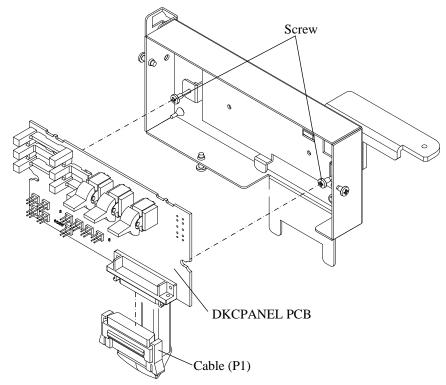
Removal of DKCPANEL PCB
